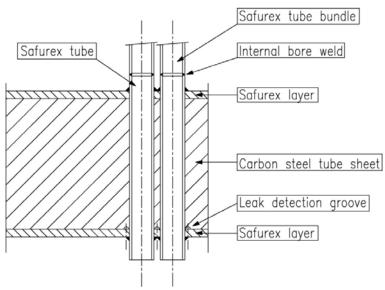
Cross section of carbon steel tube sheet with Safurex[®] layer for corrosion protection and Safurex[®] tubes.
